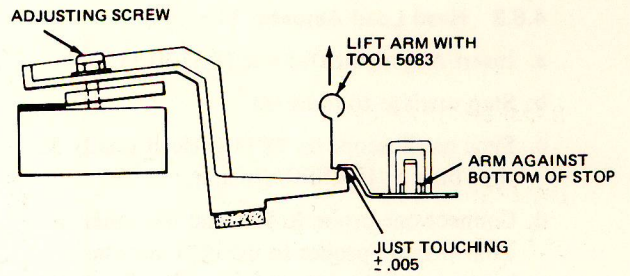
HEAD LOAD ACTUATOR ADJUSTMENT
